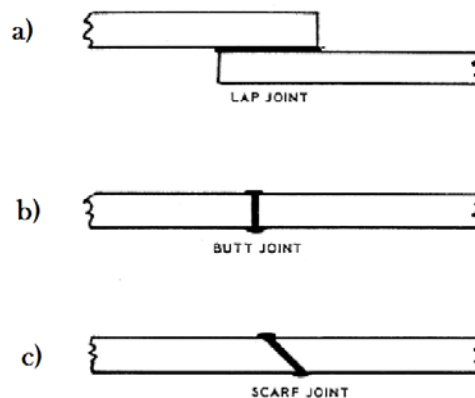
Commonly used braze joints: a) lap joint, b) butt joint, and c) scarf joint.<sup>31</sup>
